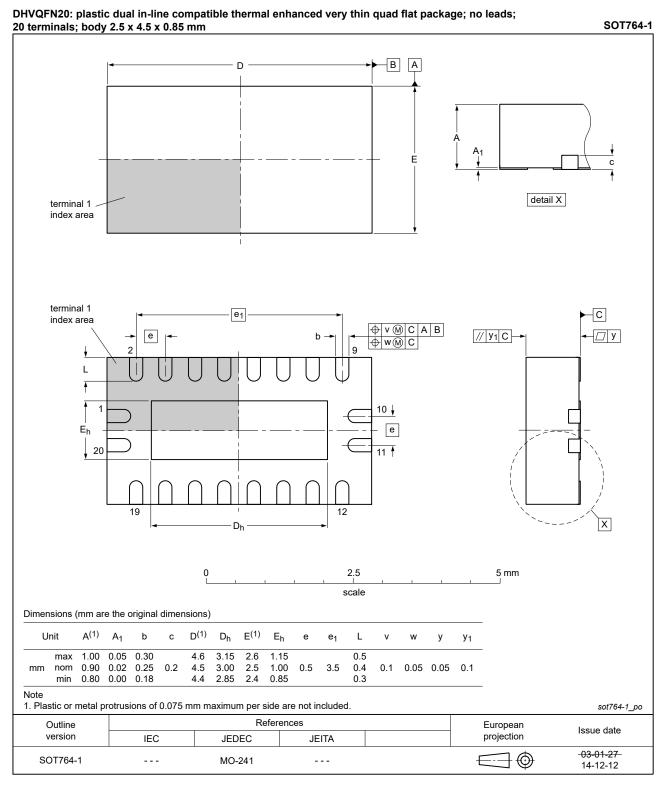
Package outline SOT764-1 (DHVQFN20)
